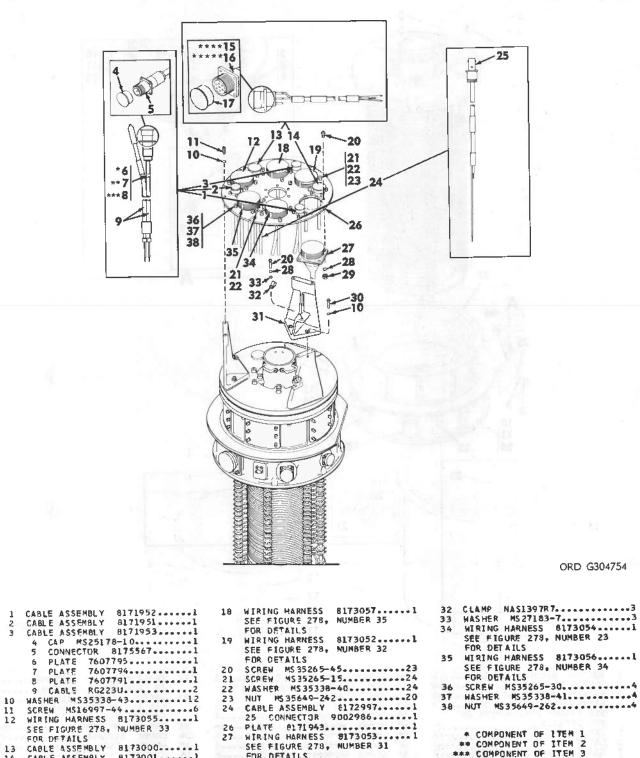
RING ASSEMBLY, ELECTRICAL CONTACT /8171910/-PARTIAL EXPLODED VIEW
